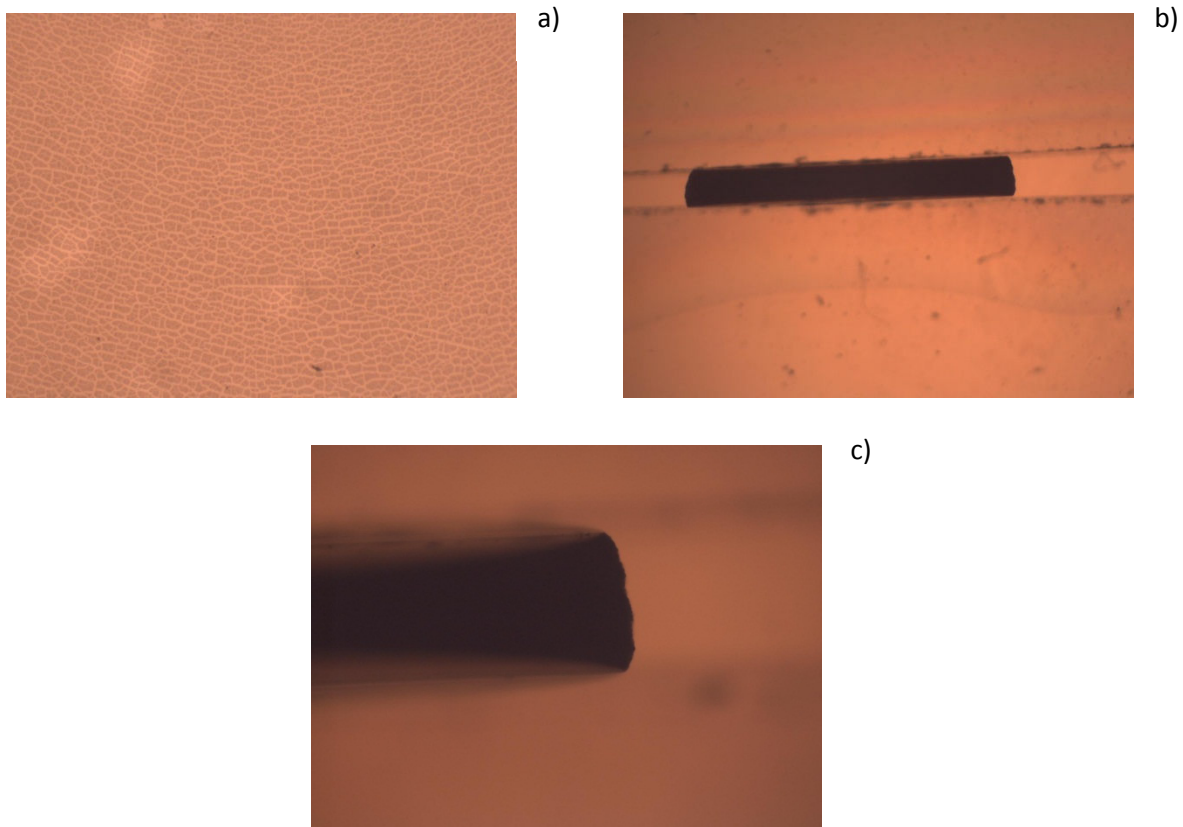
LBAL-35 glass with CC III after molding a) top view, b) side view and c) side view at higher magnification.
